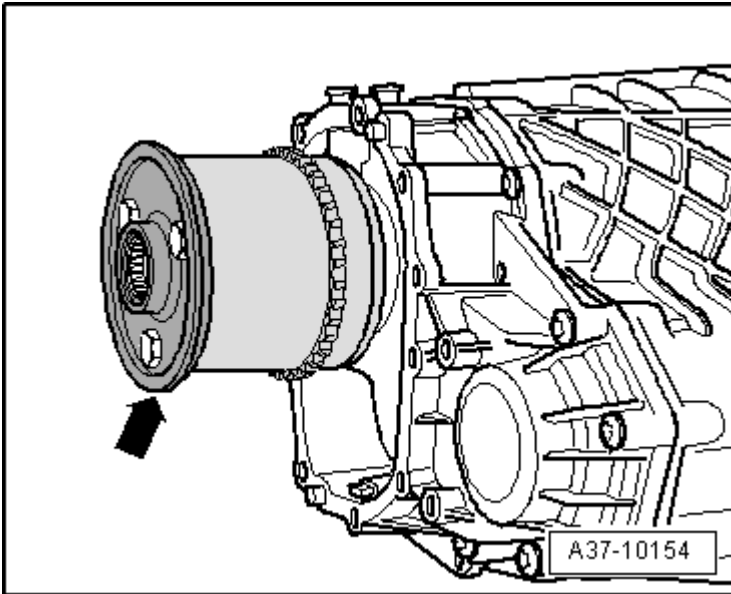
Removing/Installing Torsen Differential At Input Shaft
